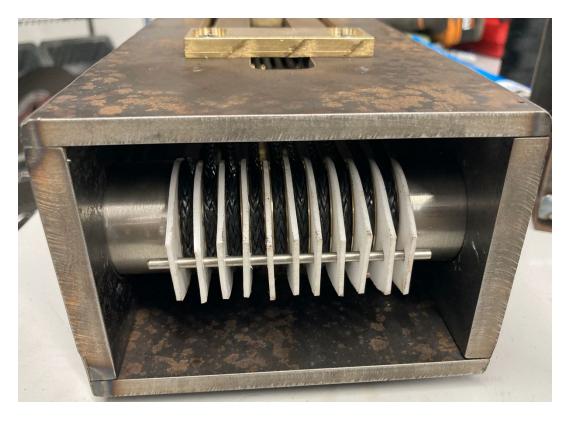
End of inner sleeve with pulley assembly detail in the 10x10 pulley configuration
